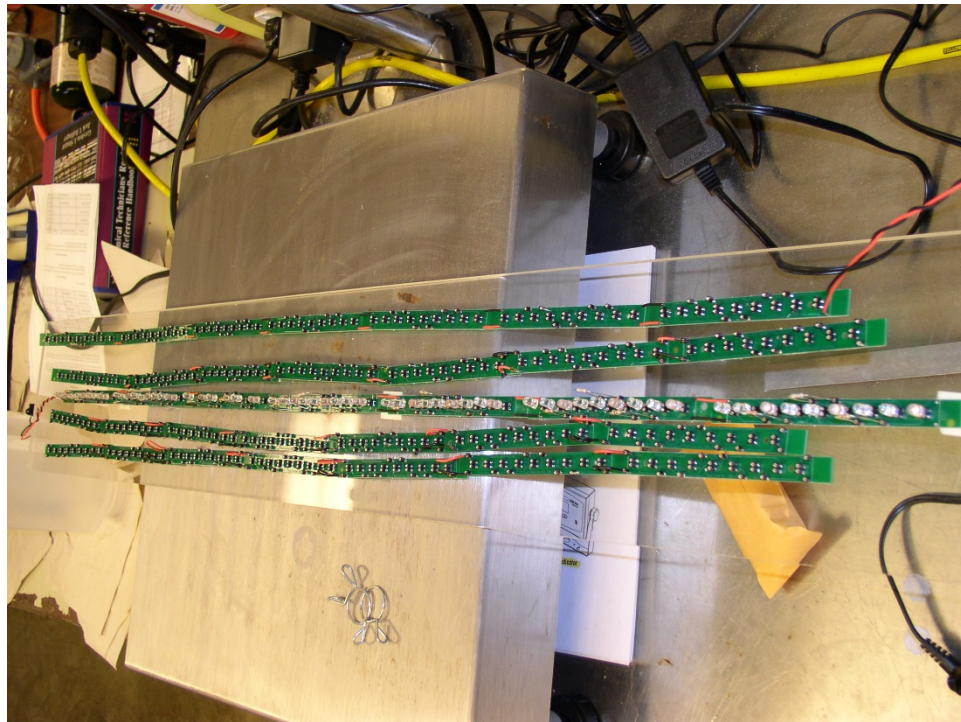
Photograph of light strips composed of the nine-LED PCB boards.
